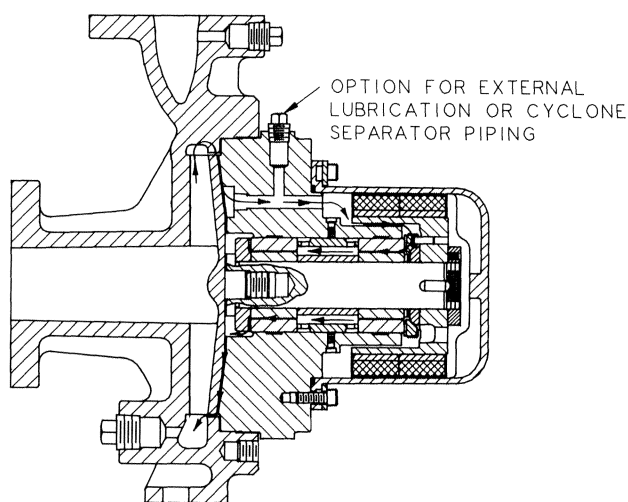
Bearing Lubrication Paths for Sealless Magnetic Drive Pump.
